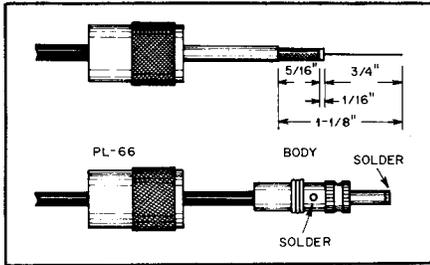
To assemble the PL-259 plug to coaxial cable, simply cut back the vinyl jacket 1-1/8 inches, bare the center conductor as shown and tin. Trim the braid, leaving 1/16-inch of polyethylene dielectric protruding, and tin. Screw plug body onto the cable, solder at points indicated and screw the coupling ring on the body.
